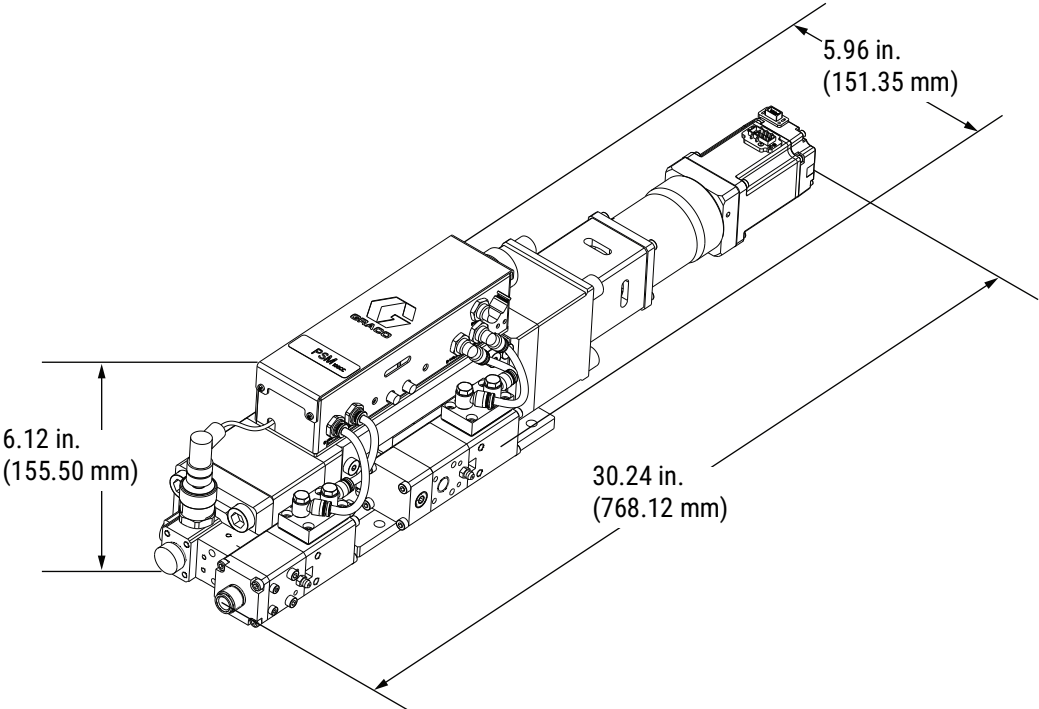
PSM Ambient Metering Unit Dimensions, 100 cc
